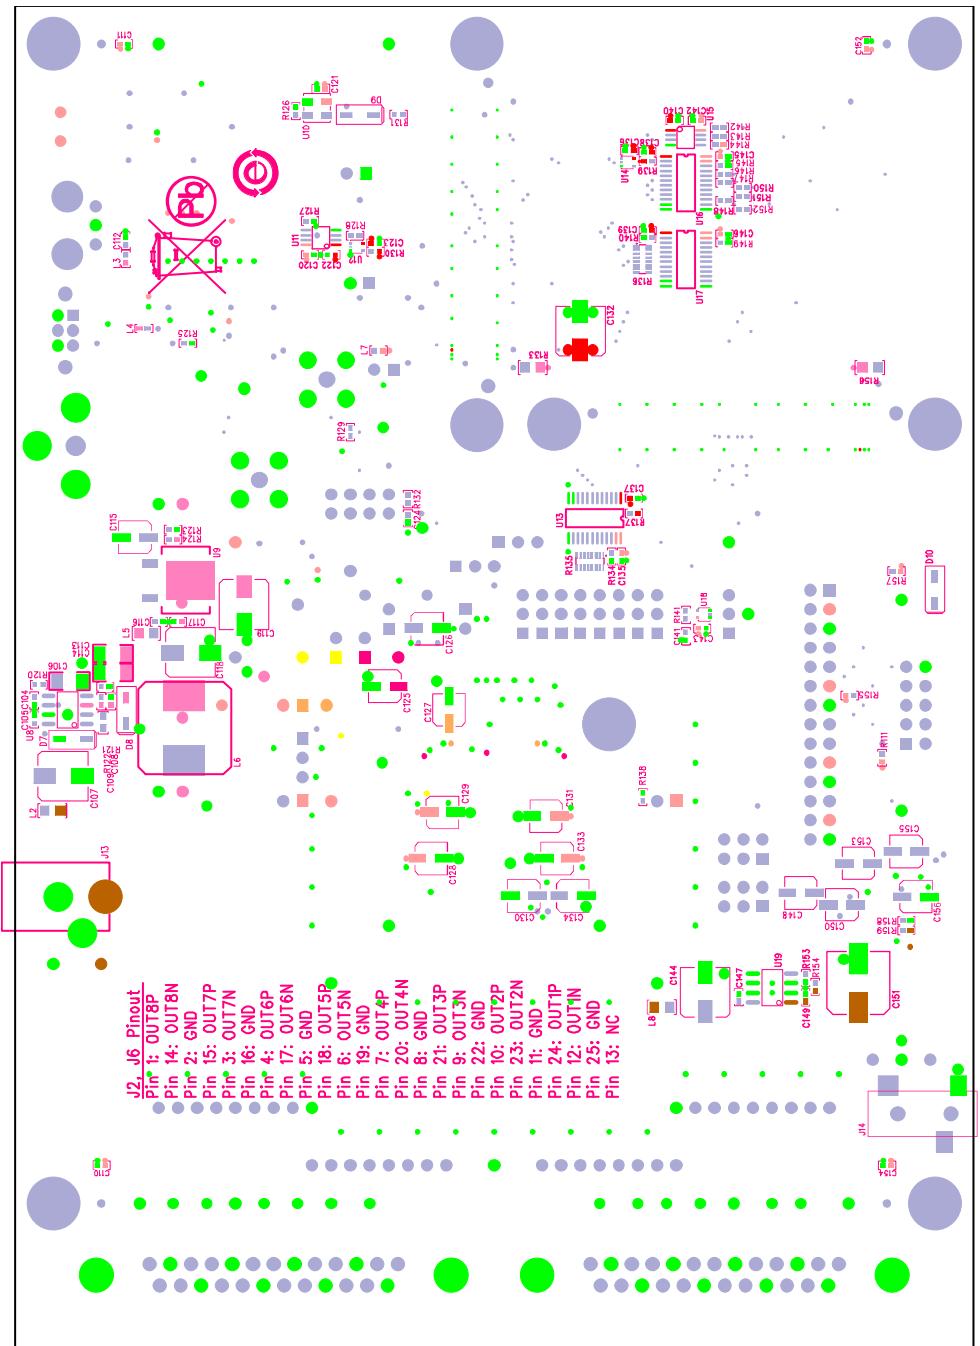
ADAU1962/ADAU1966 Evaluation Board, Bottom Assembly
